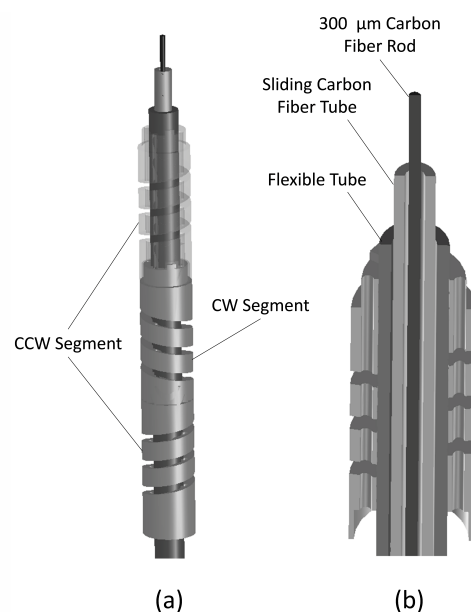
Schematic of three segments stacked together in catheter distal assembly (a). Cut section of assembly (b).
